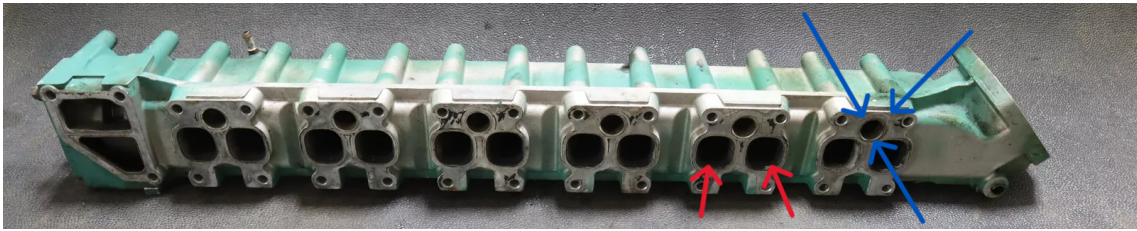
Exhaust manifold for the D6 (Blue=coolant channel. Red=exhaust gas channels)
